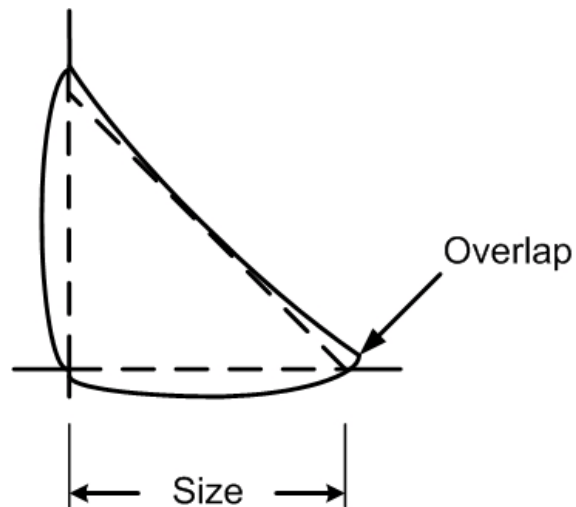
Overlap of a Fillet Weld
